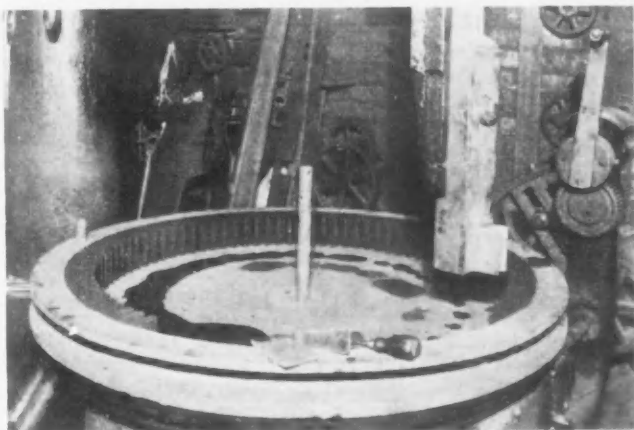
Large gears are accurately machine-molded with an indexing tooth form
